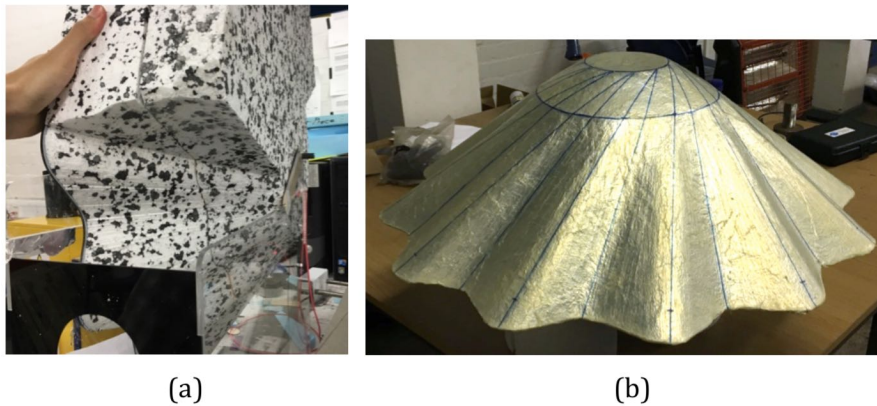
The single-sided mould for latex rubber prototype fabrication, (a) cutting foam core using the customised jig, (b) the finished mould
